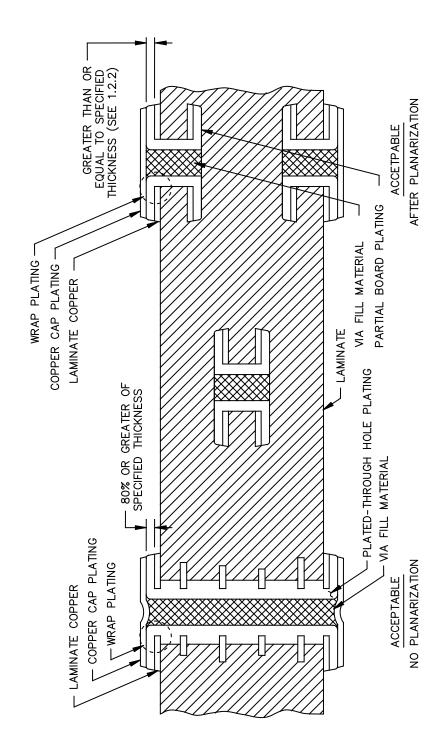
Acceptable plated-through hole wrap plating (continuous hole-knee-surface copper plating).
